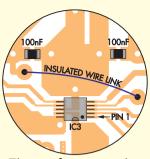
a close-up section of the bottom side of the board, showing just the area of interest for the SMD components. Note how IC3's leads are positioned precisely in the centre of the rectangular pads
